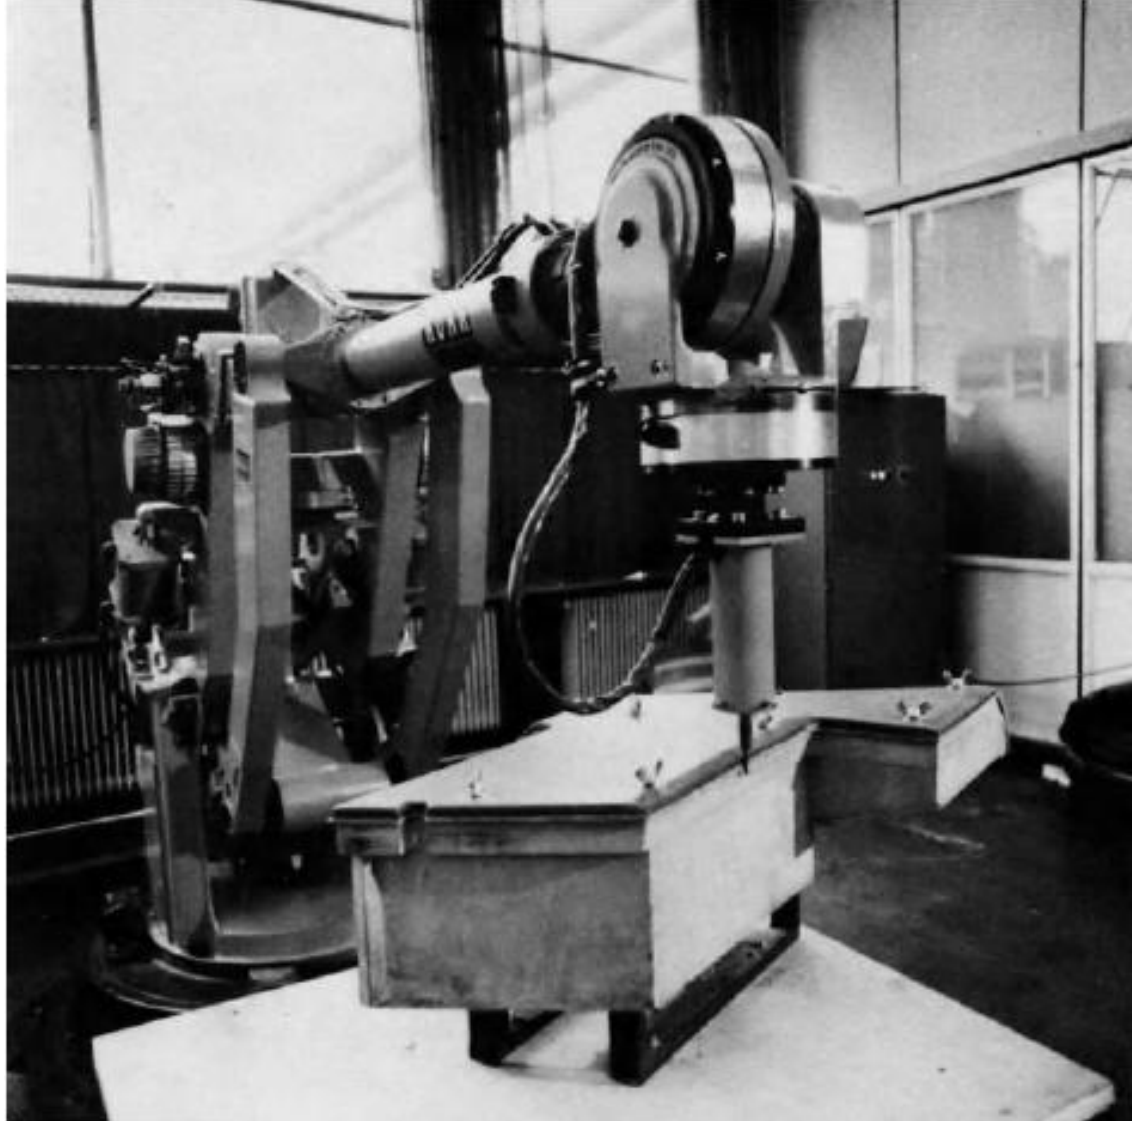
A contouring (edge-following) operation with a robot held grinder (courtesy KUKA Welding Systems & Robots Ltd).
